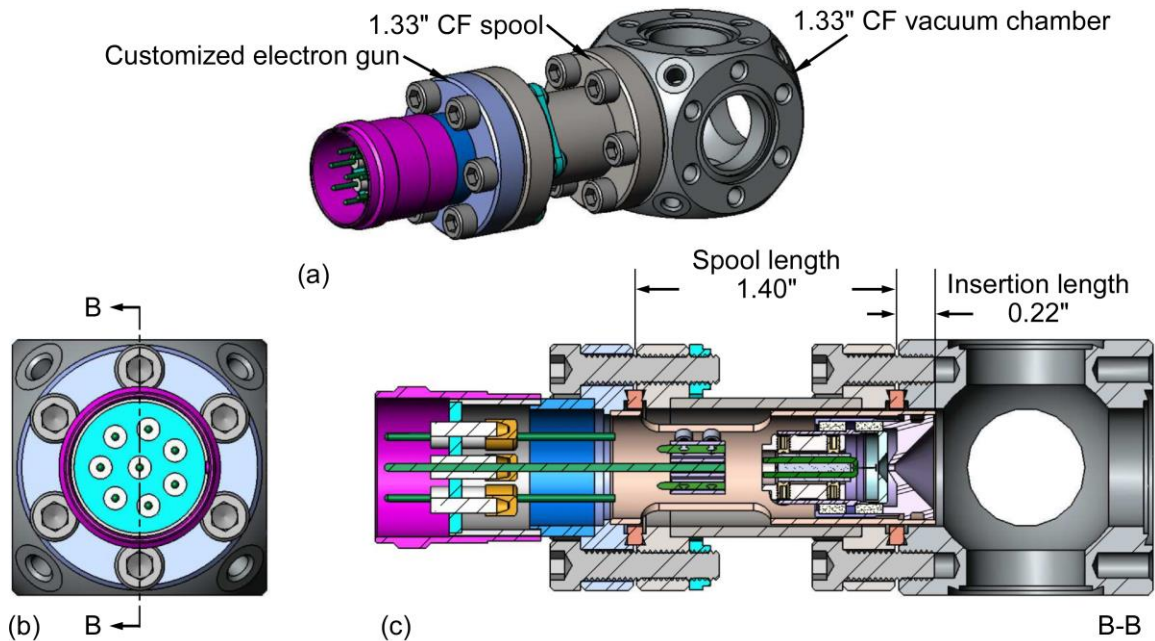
Customized electron gun assembled on the 1.33" CF vacuum chamber. (a) 3D schematic. (b) Left view. (c) B-B section view. (Solid models courtesy of Kimball Physics)
